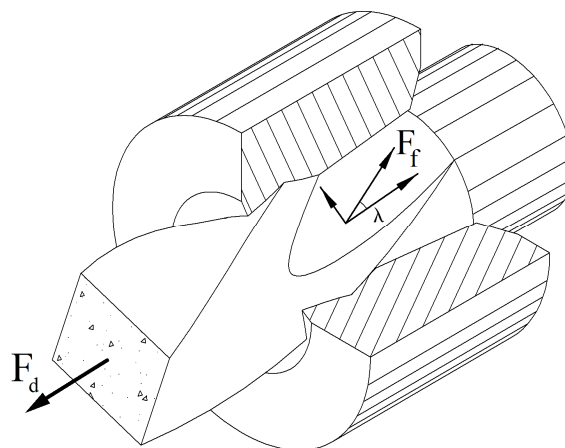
Drawing process of a circular round bar to a twisted square section rod.
